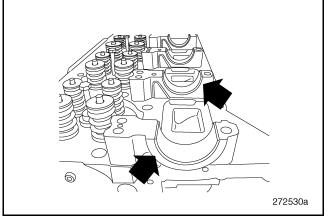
No. 7 Camshaft Lower Bearing Insert
